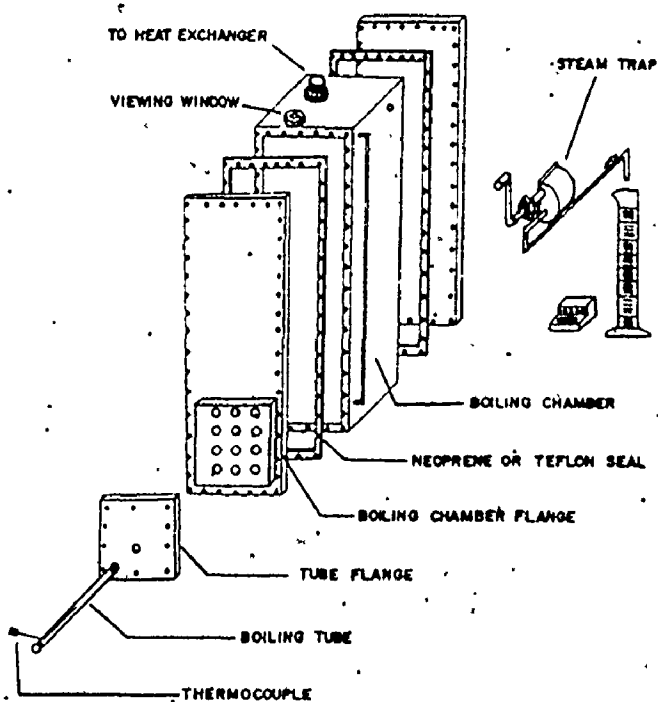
BOILING CHAMBER ASSEMBLY
